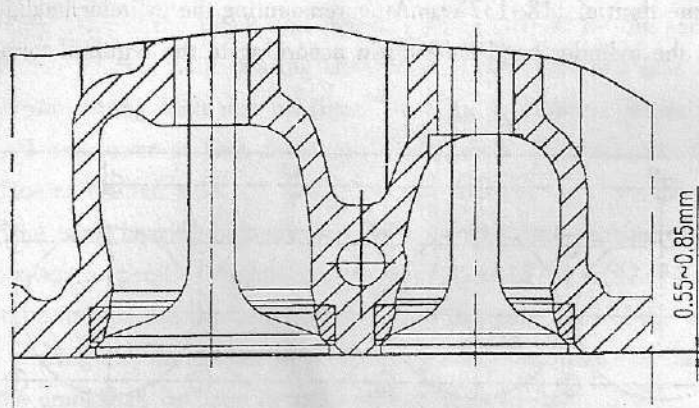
Depth of valve surface below the surface of the cylinder head
